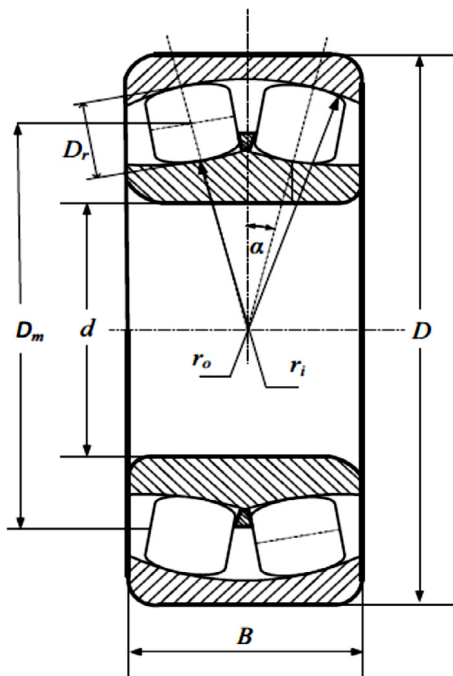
Schematic diagram of a spherical roller bearing [18].
